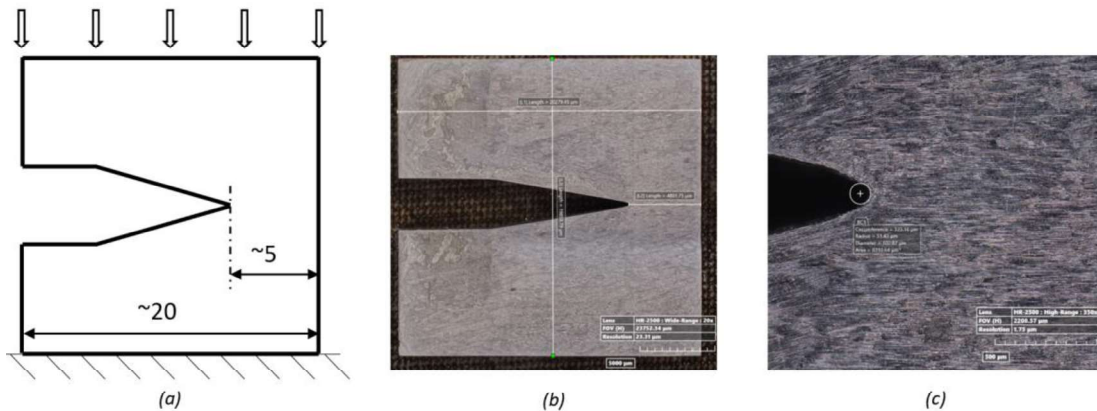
Small scale specimens manufactured: (a) nominal dimensions and loading scheme, (b) actual specimen microscopy with dimensions, (c) detail of the notch tip.
